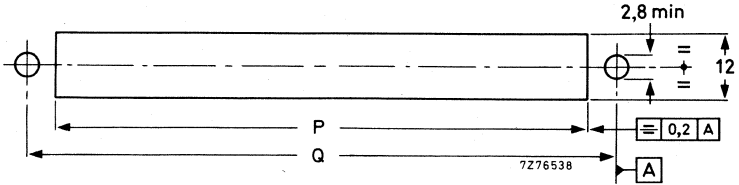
Panel cut-out for the male part; see Table 4 for dimensions P and Q.
